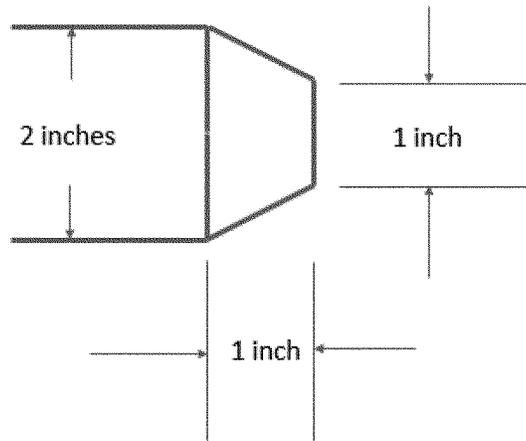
Illustration of Debris Penetrator Test Dowel Tip Taper
